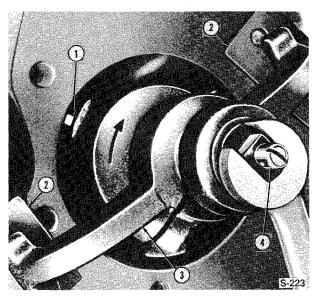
Removing Cylinder Ridge 1. Cutter Blade 3. Reamer 2. Shoe
